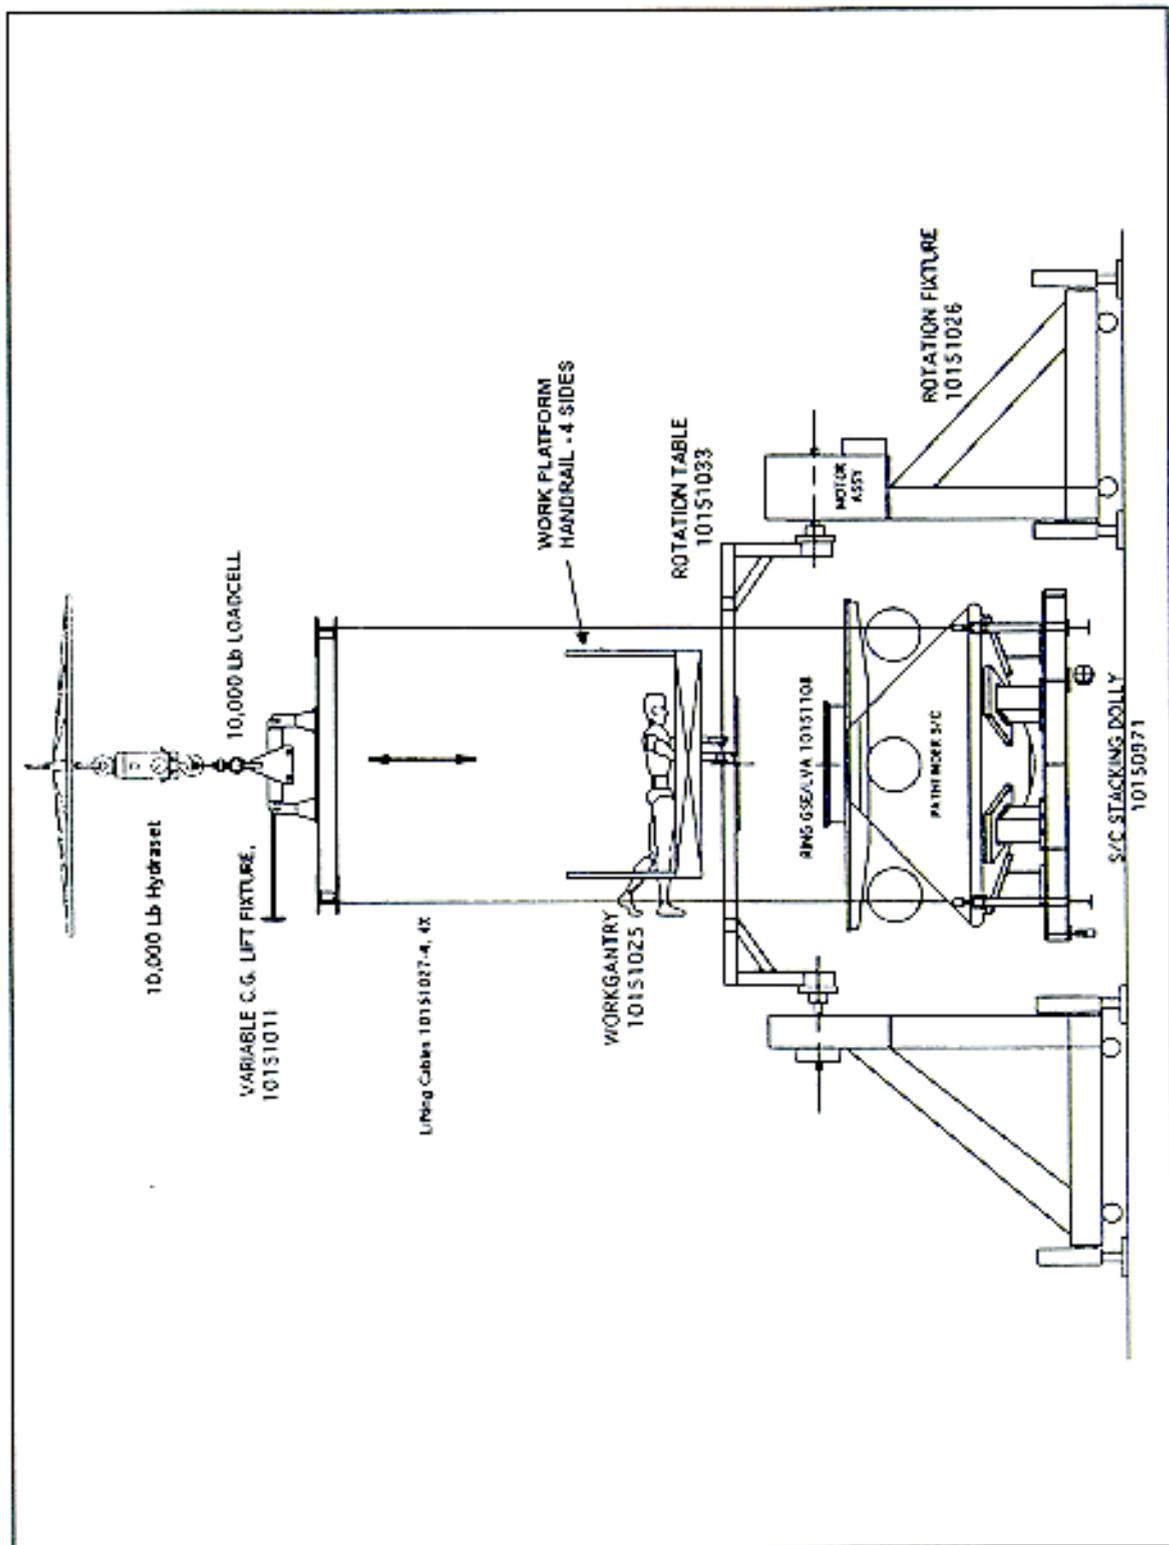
Attaching/Detaching the EDL On & Off the Turnover Fixture
